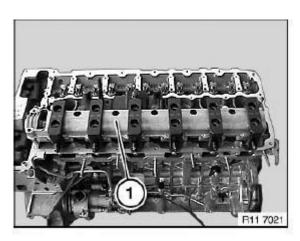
Identifying Intake Camshaft With Bearing Strips Courtesy of BMW OF NORTH AMERICA, INC.
